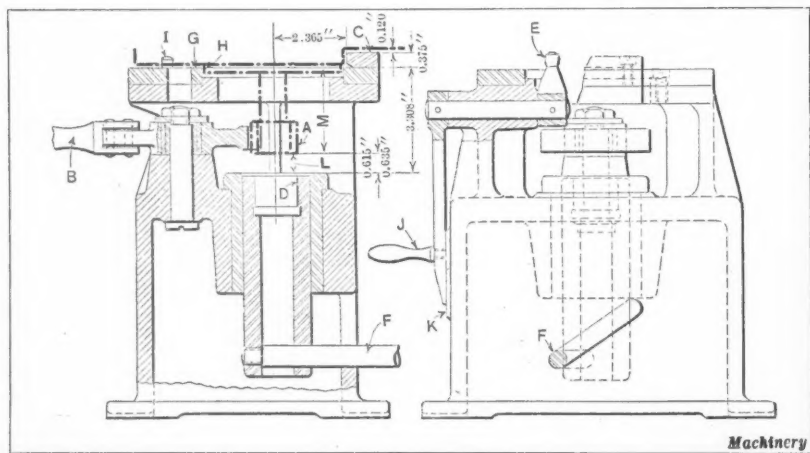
Sectional View of the Motor Generator Testing Device shown in Fig. 10
